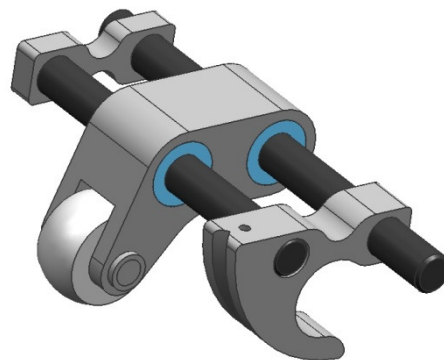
CAD model of the follower and roller assembly used with the internal cam design.
